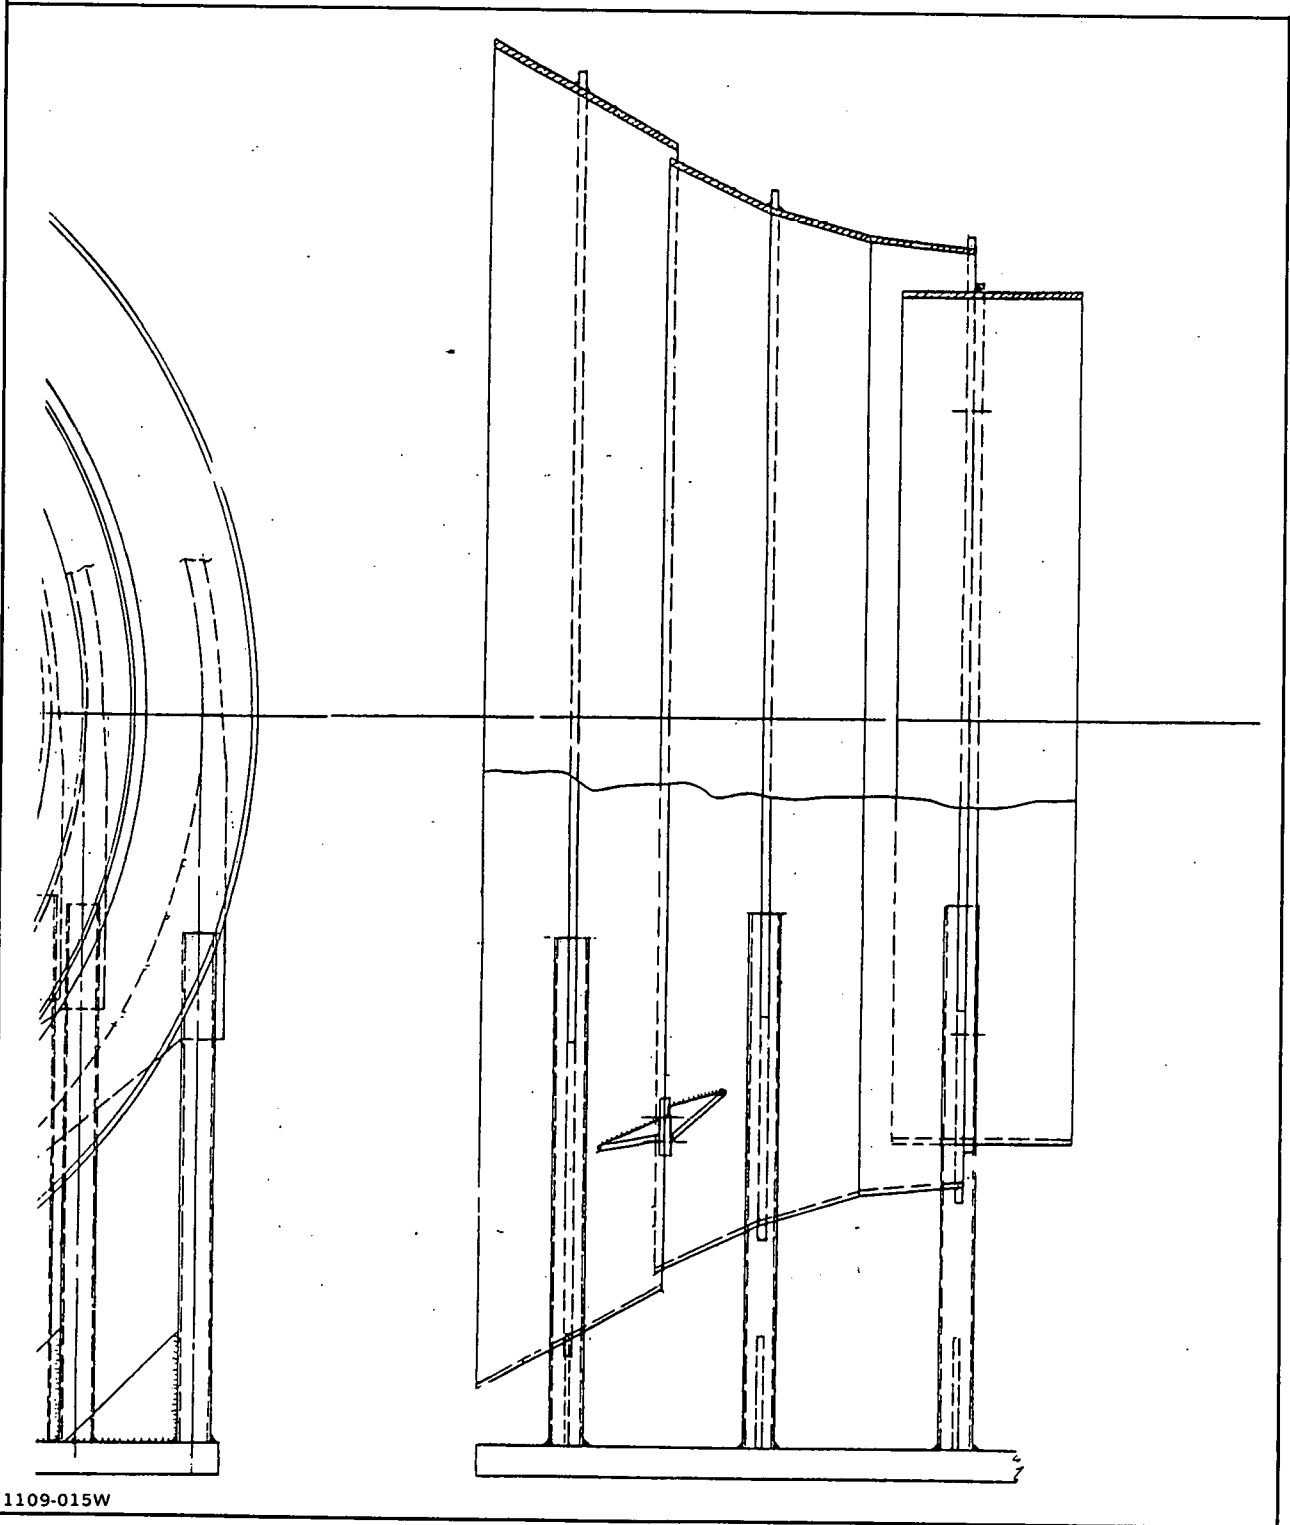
Alternate No. 1. Flat Thick Aluminum Plate, External Stiffeners, Welded Assembly, Center Pivot and Casters Base
